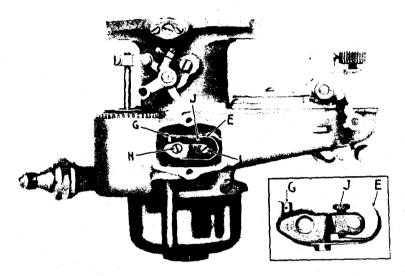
Carburetor, Single Thermostat Type (Used on early Type 61 cars)
